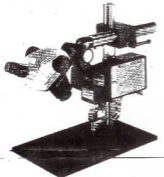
Model 50F Light Force Weld Head shown with optional optic.
